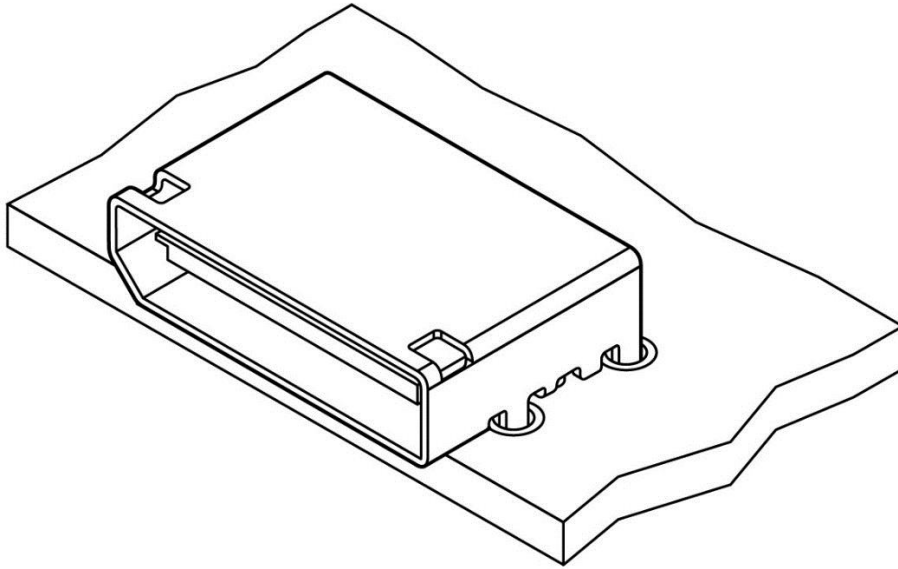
Isometric View of the x4 Fixed Host Board-side Right Angle Connector
